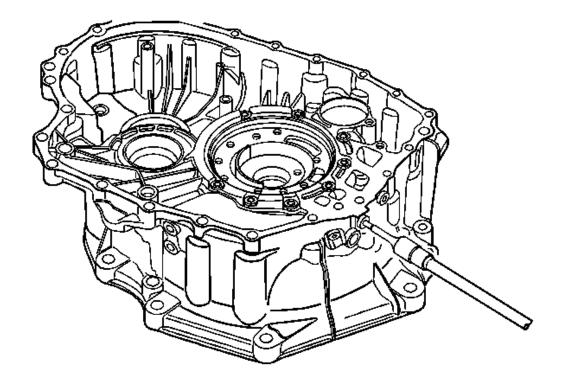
Replacing 2-6 Clutch Piston Courtesy of GENERAL MOTORS CORP.
